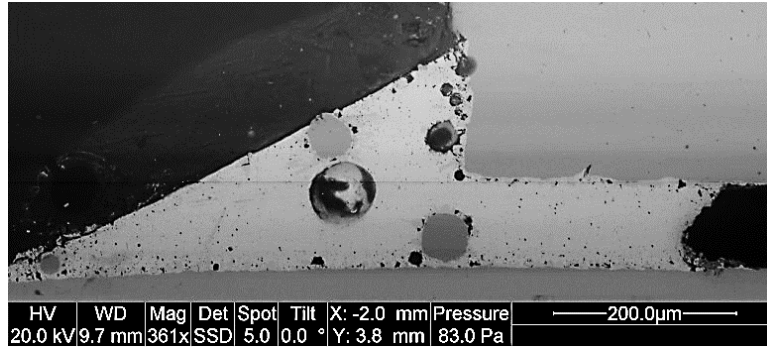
ESEM image of crack in Sn3.5Ag solder joint; after 1000 drops, no isothermal aging
